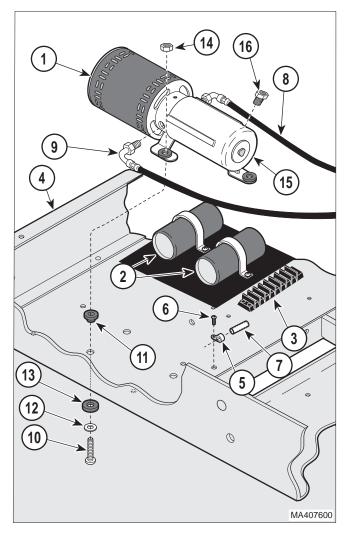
Hydraulic Motor / Pump Removal / Installation
